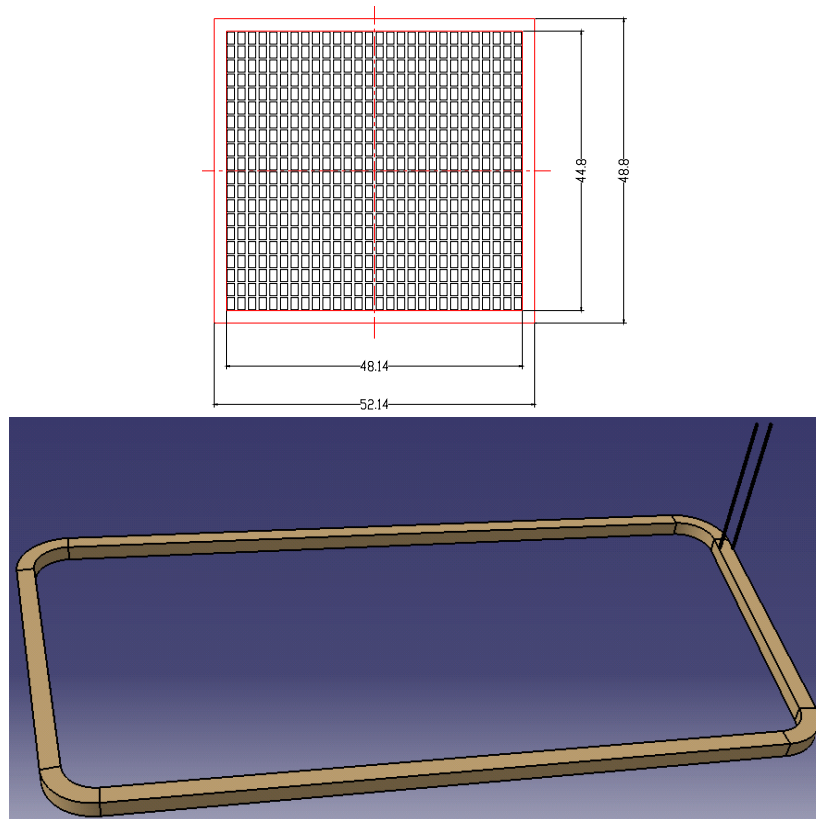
Cross section of the coil (upper panel) and coil top view after vacuum impregnation (lower panel)
